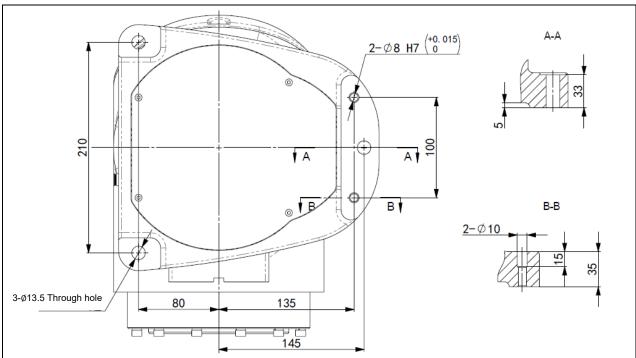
Robot base mounting dimension (ER10-900-MI/HI)
